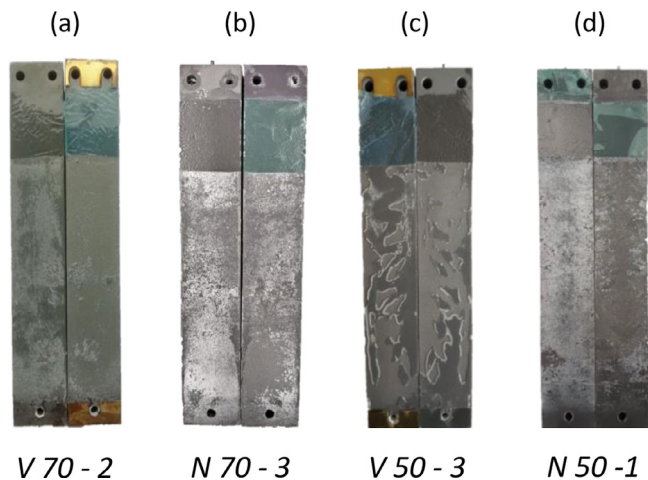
Fracture surface after DCB test on V 70 - 2 (a), N 70 - 3 (b), V 50 - 3 (c) and N 50 - 1 (d).
